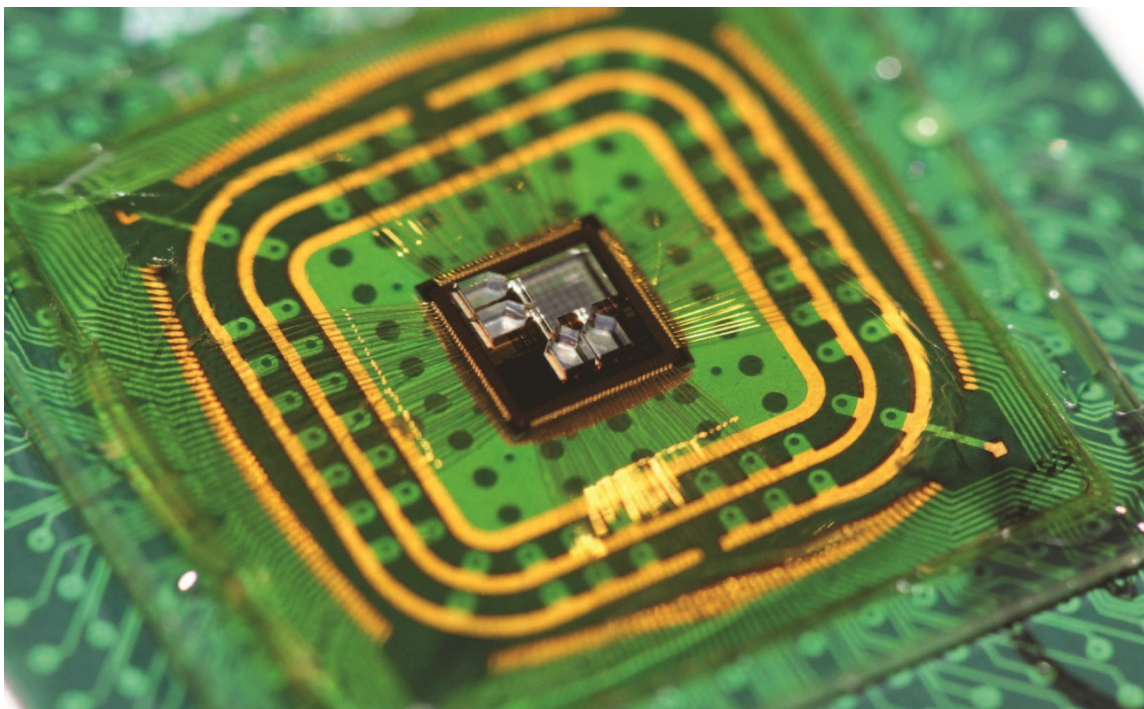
Photograph of an SU-8 encapsulated, wirebonded PCR chip on a BGA package
